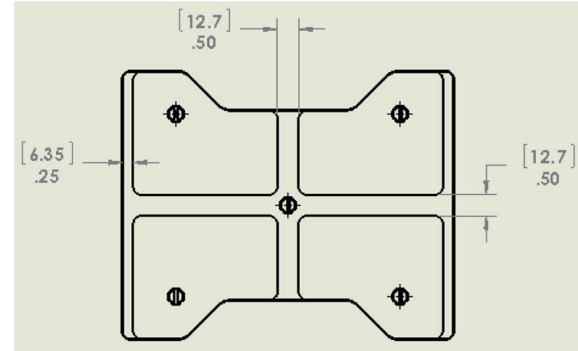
Dimensions of the drainage channels on the bottom of Safe-T-Tile® in inches and [millimeters]
